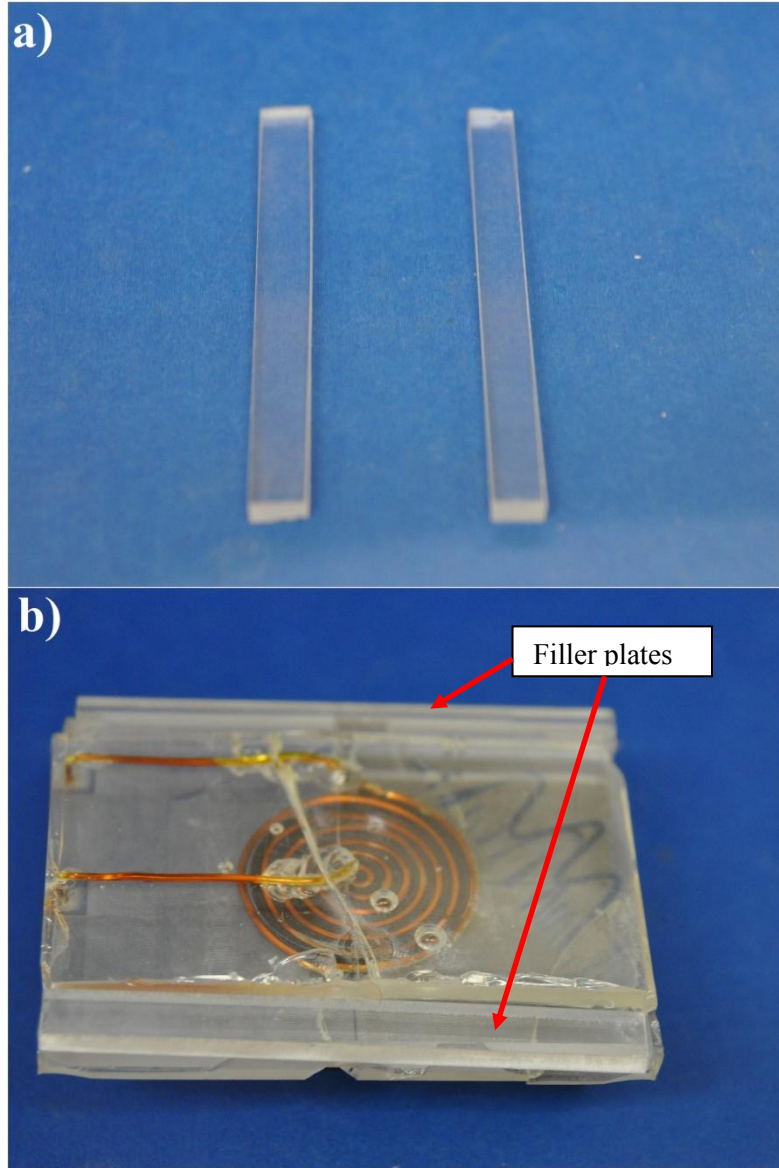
Images of filler plates used to mold reference cavities into epoxy covering of coil. Images show a) polycarbonate filler plates and b) location of filler plates with respect to the spiral winding during the epoxy pour. The surface shown in image b) corresponds to that in contact with the bottom of the mold.
